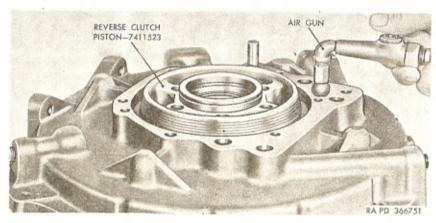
Use of air gun-B7950562 to remove reverse clutch piston.
